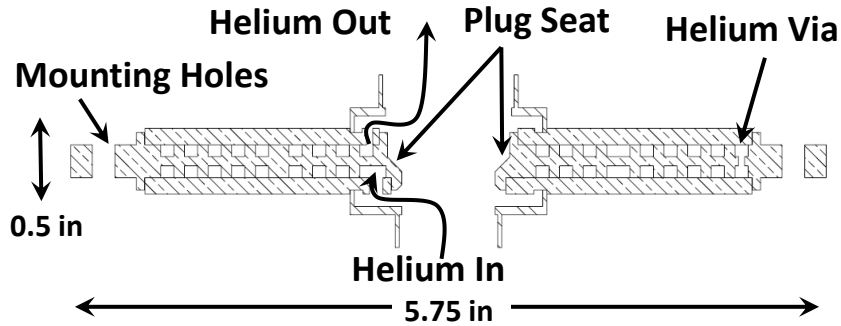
Cross section view of the heat exchanger assembly showing the location of the plug seat and the path the helium gas follows through the exchanger. A more detailed view of the heat exchanger construction is shown in Figure 6.7.
